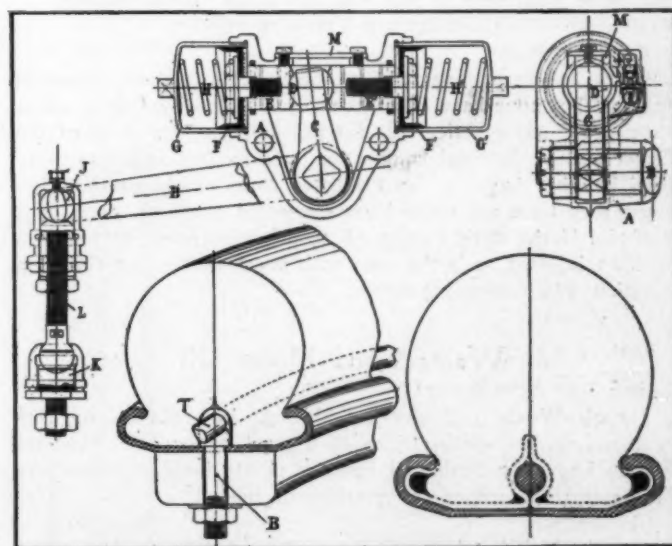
Pneumatic spring element and solid cushion tire, forming parts of the Amans vehicle suspension recently brought out in Belgium. The tire shown in sections taken at and between bolts B
